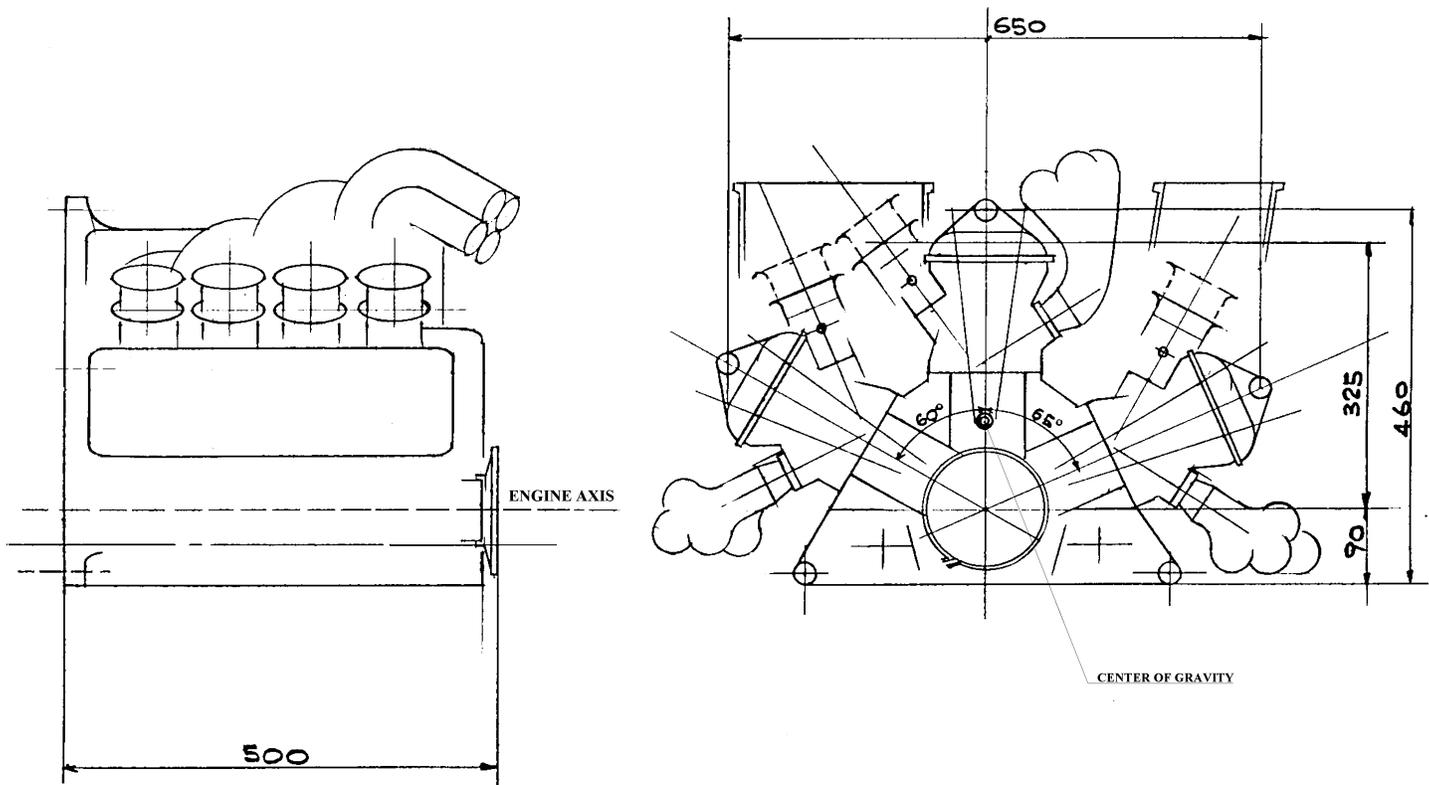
Lay-out of the W12 engine. It is made up of three banks of cylinders and one simple crankshaft. Each crankpin bears three equal connecting rods, one from each bank. The engine is connected to the cockpit by 5 point.
